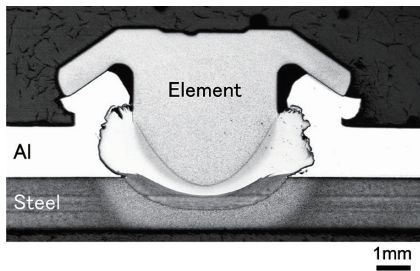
Cross section of weld made by EJOWELD®
